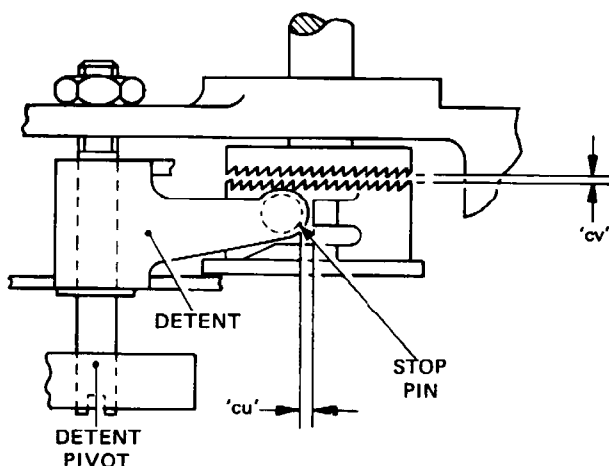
FEED UNIT TRIP LATCH - REST POSITION
